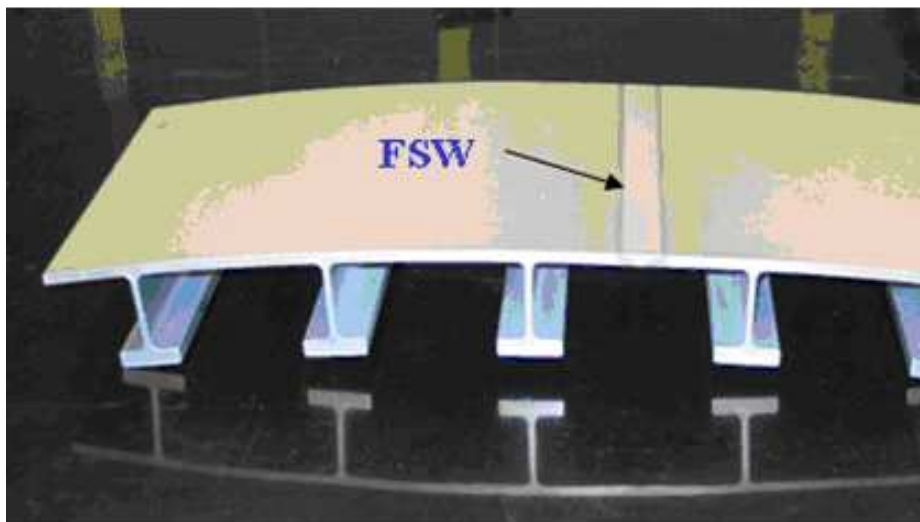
Integral metallic structure: FS welded wing panel [Courtesy AIRBUS UK].
